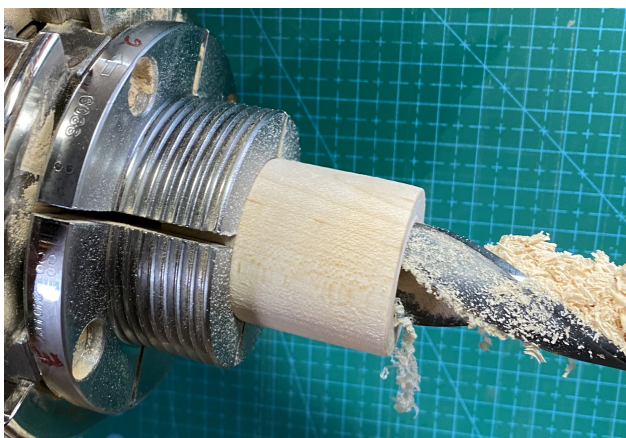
Drilling out the lure-sleeve gripper with a $\frac{3}{4}$ " MT2 drill on the lathe.
